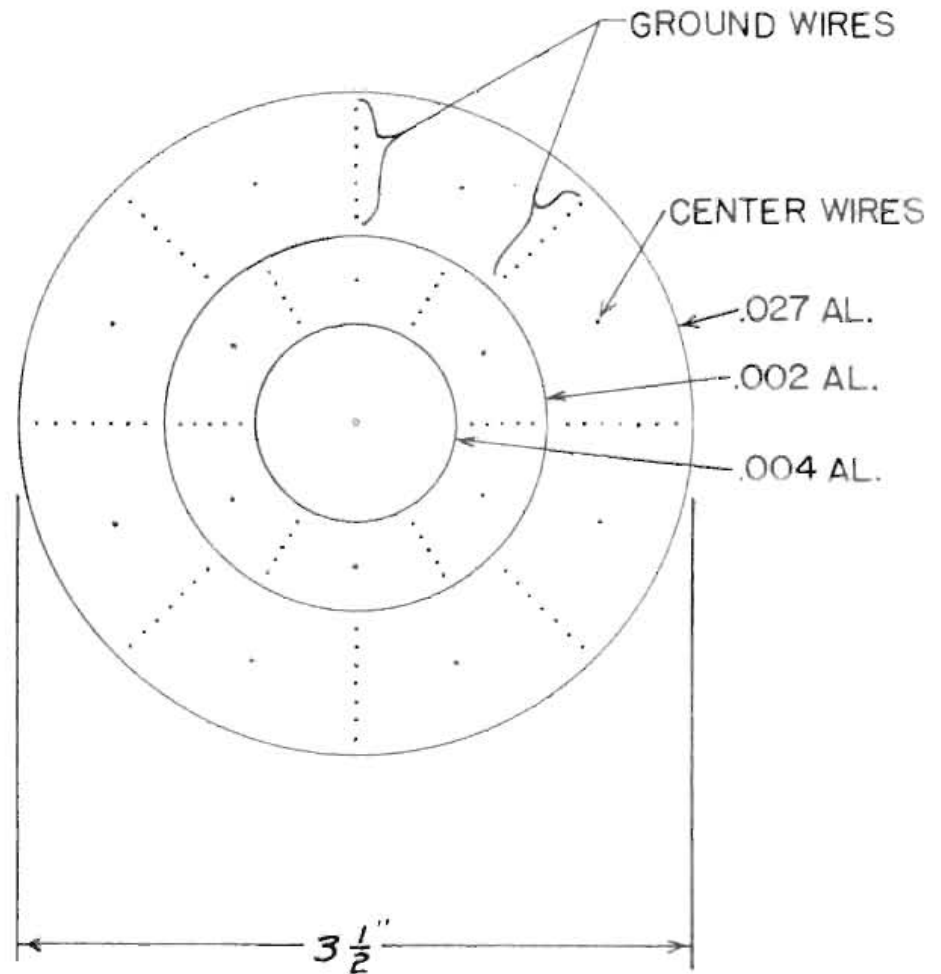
TRANSVERSE SECTION OF MULTI-COUNTER
